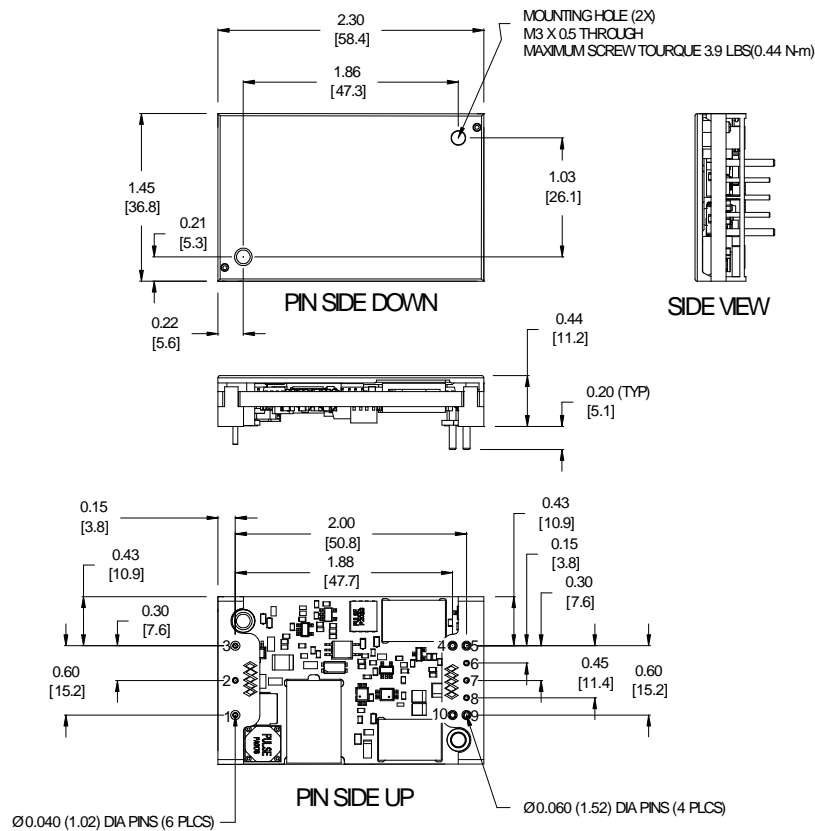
AEQ75Y48 (Baseplate) Mechanical Outline Drawing
